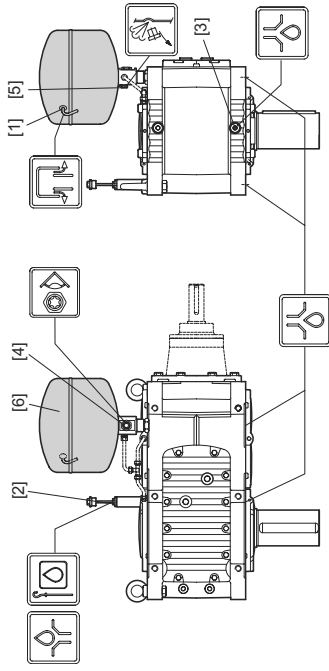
MC.PV../MC.RV.. industrial gear unit with steel oil expansion tank
